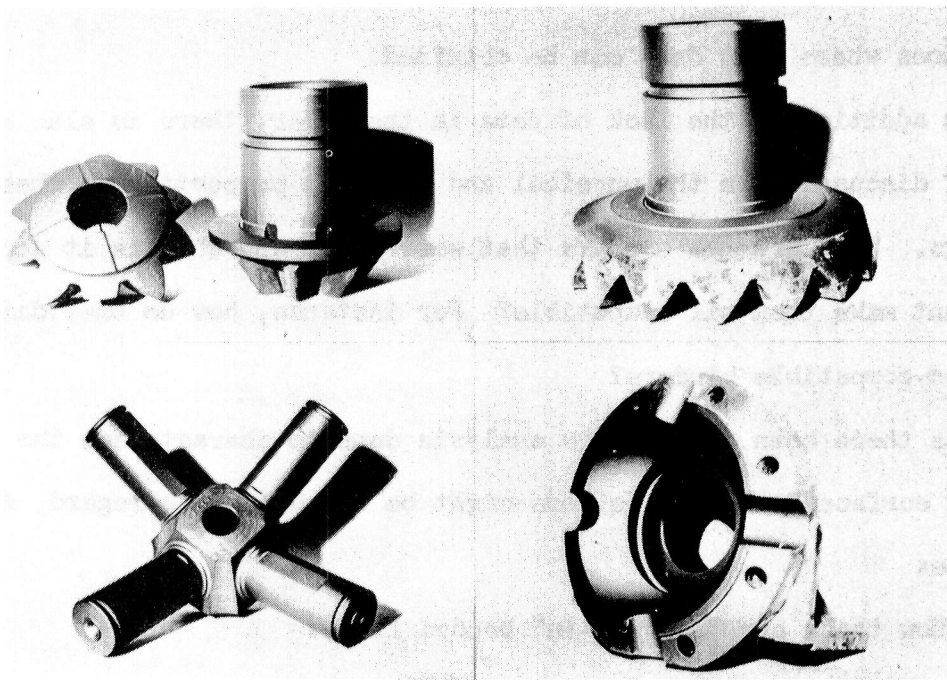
Differential gear parts coated with a lubricating lacquer.
